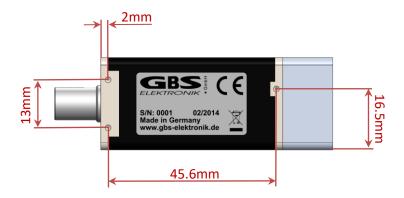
CUBE527R DIMENSIONS DEVICE MOUNTING HOLES, M2
